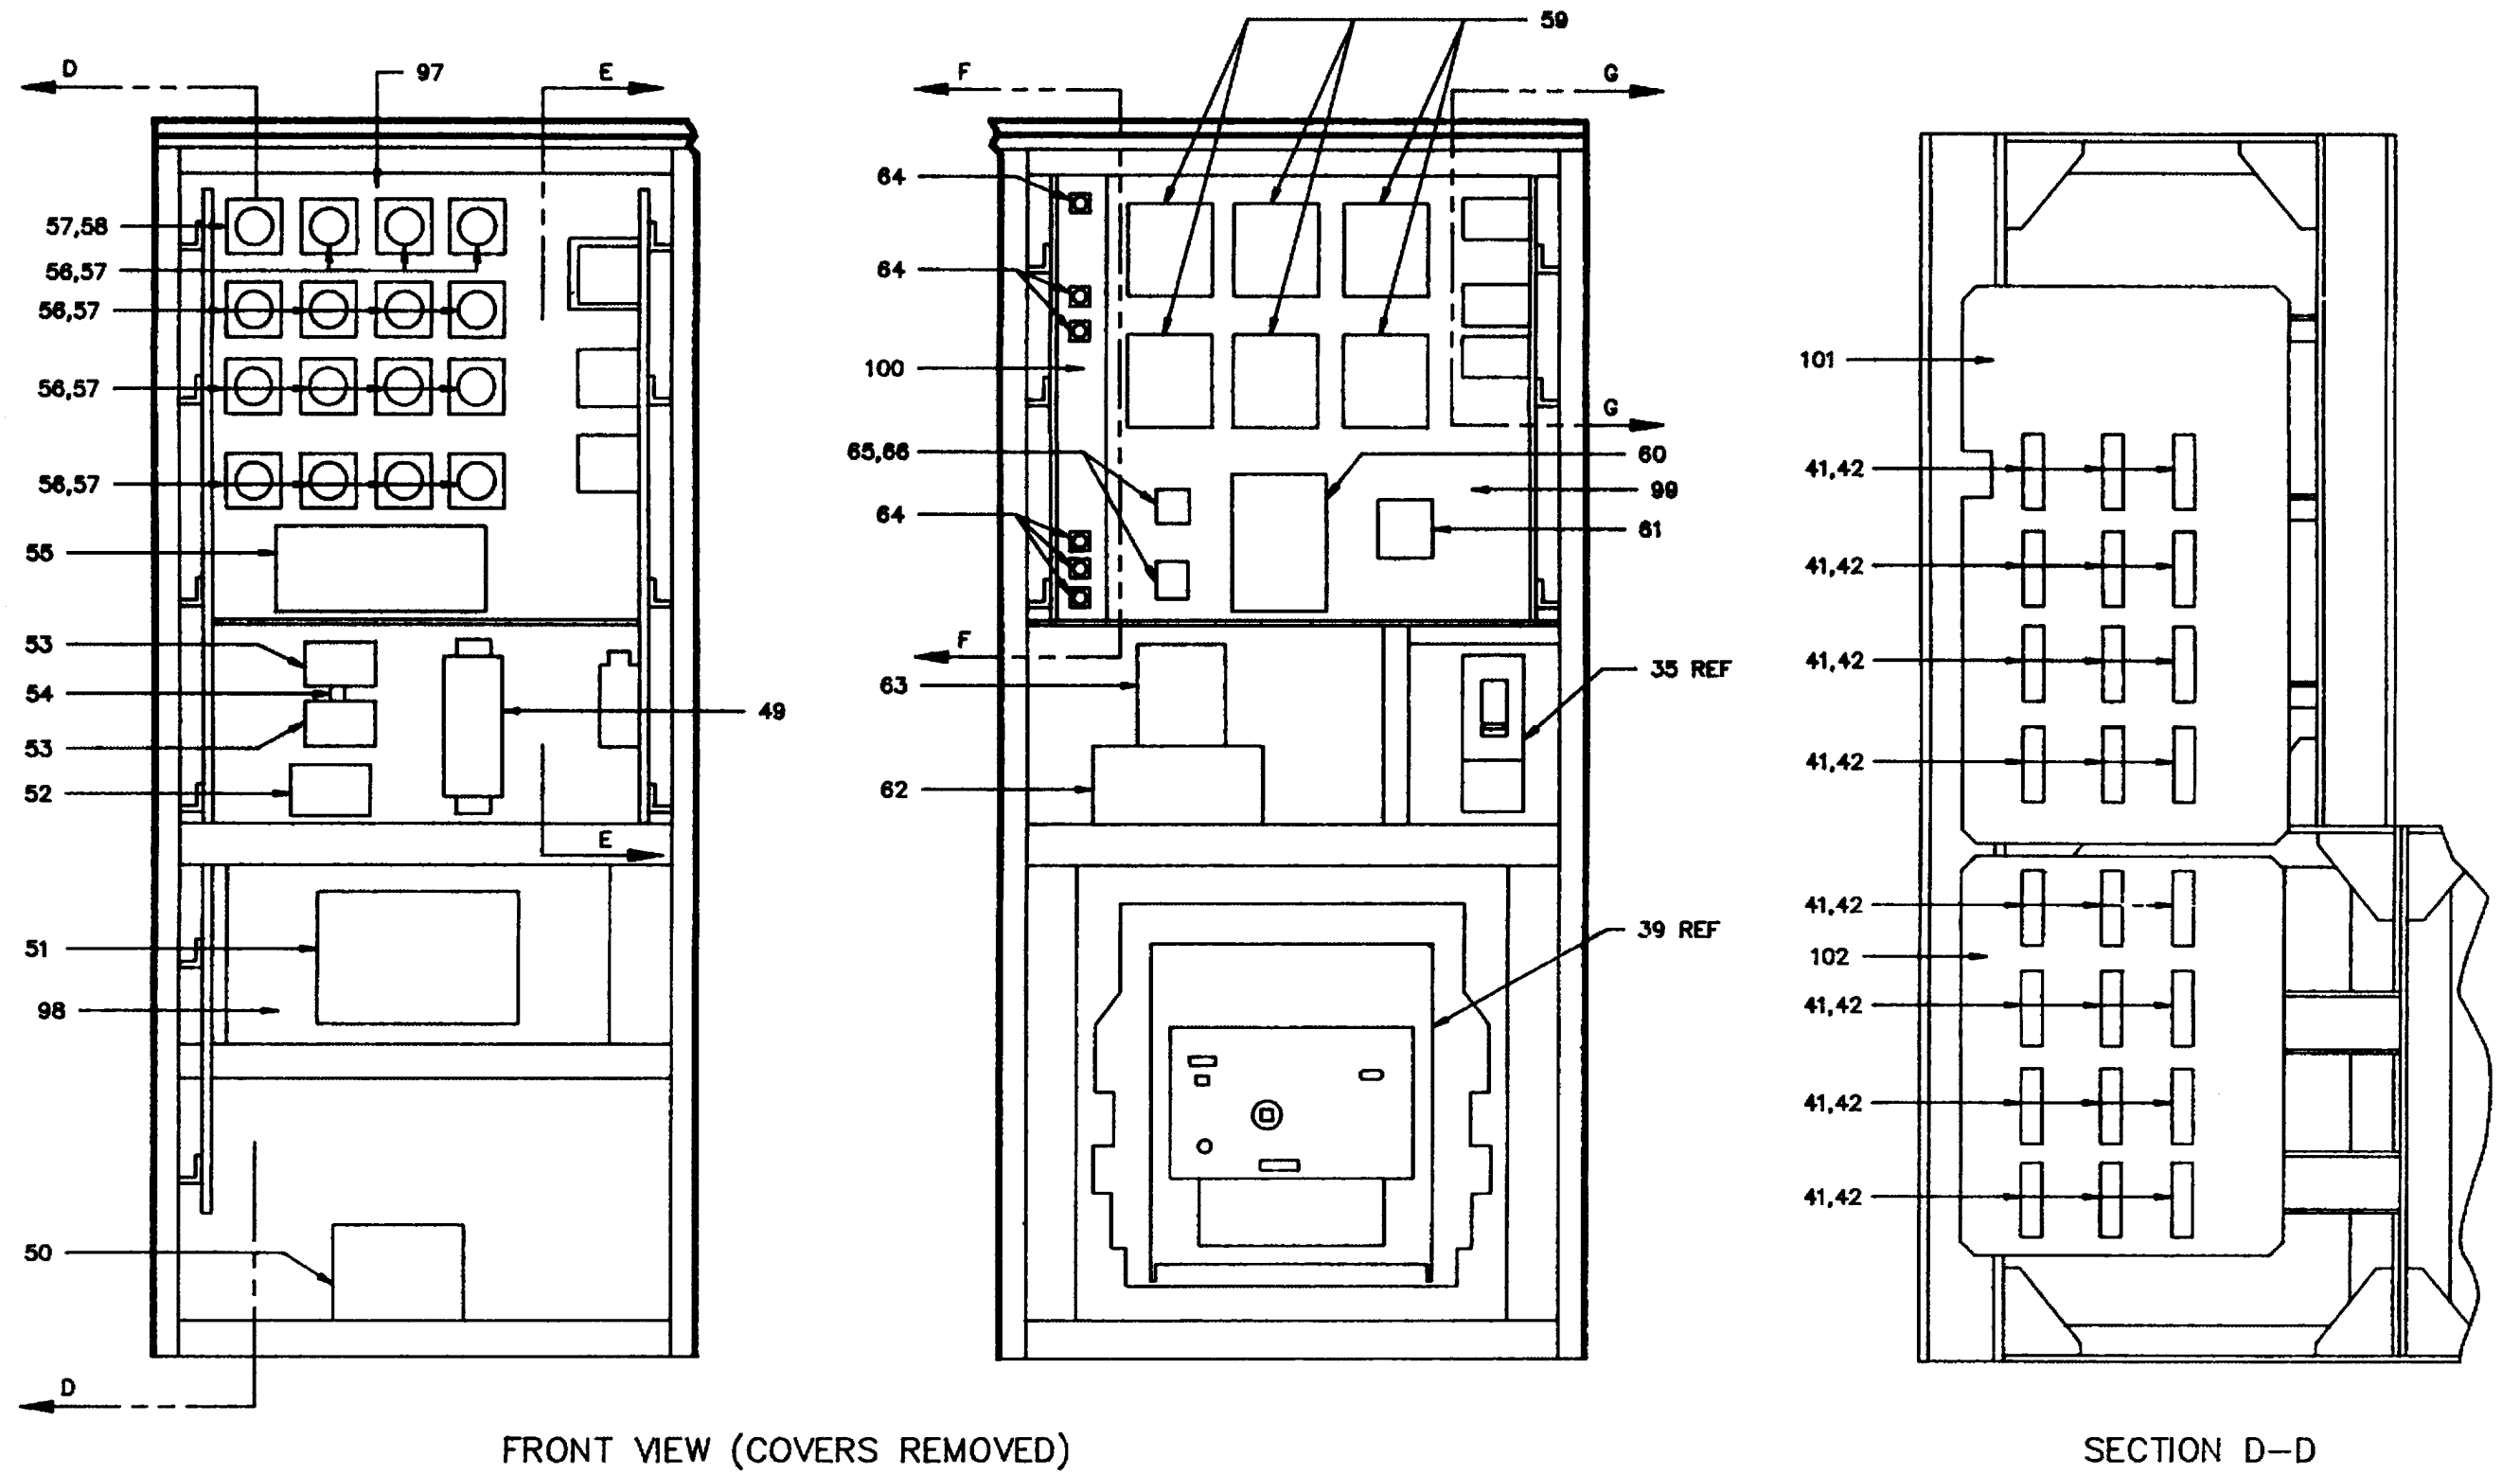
2SG Switchboard Assembly (Sheet 2 of 3)
